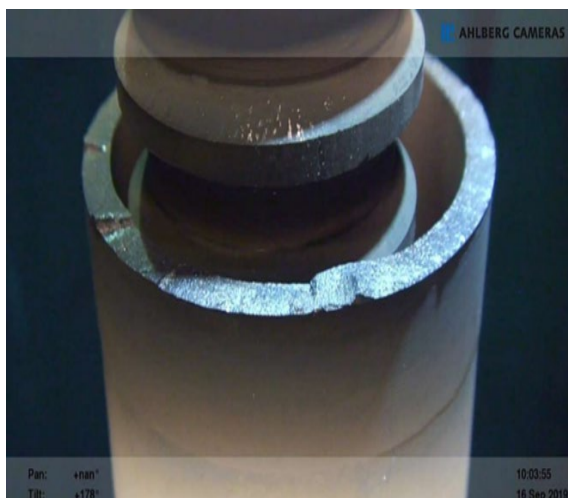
Thermal Sleeve Flange Failure Location
